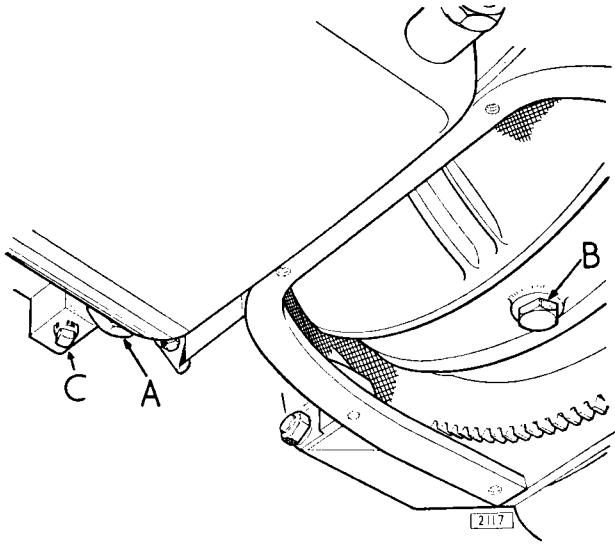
Automatic transmission drain plugs (the converter housing cover plate has been removed)
